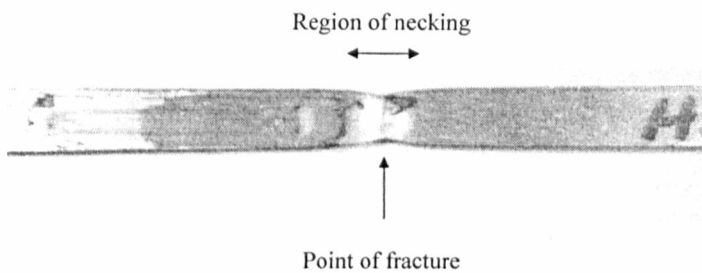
Reassembled tensile coupon showing the necking around the fracture point
